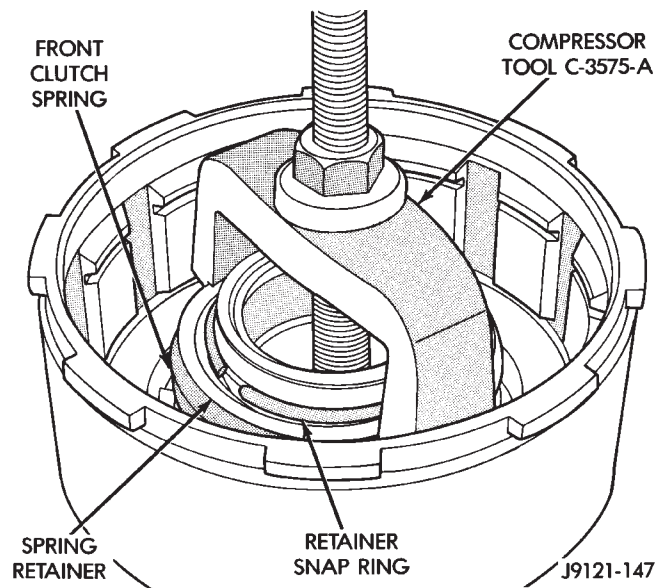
Compressing Front Clutch Piston Spring (42RH)
